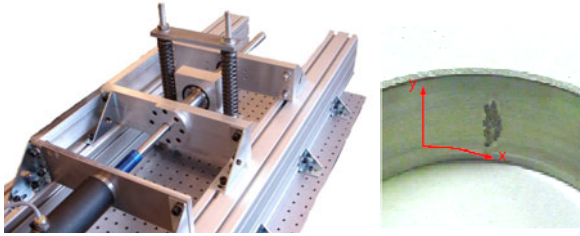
Test bench modeled and example of bearing outer ring with fault.
